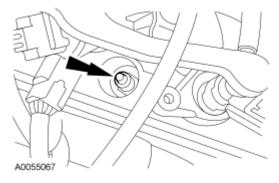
Spark Plug Courtesy of FORD MOTOR CO.
